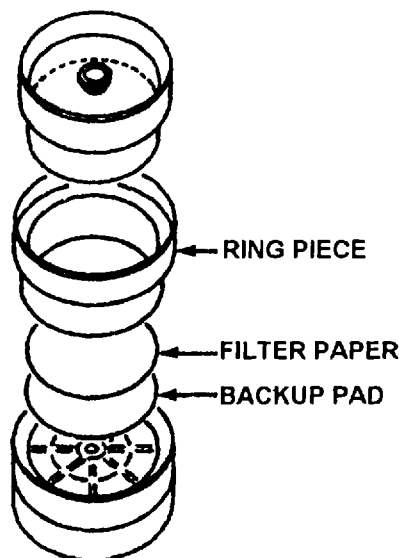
Exploded view of a three piece cassette shows placement of backup pad.
